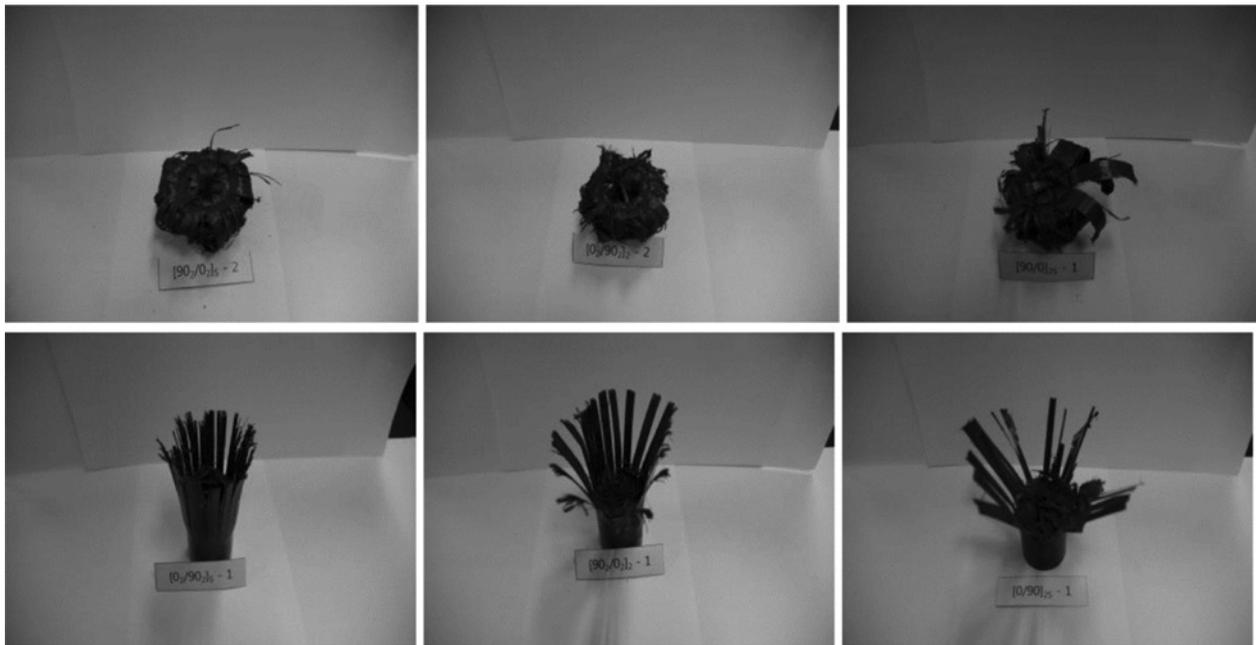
Typical collapse modes of the 90° external sheet CFRP specimen and typical collapse modes of the 0° external sheet CFRP specimens.
